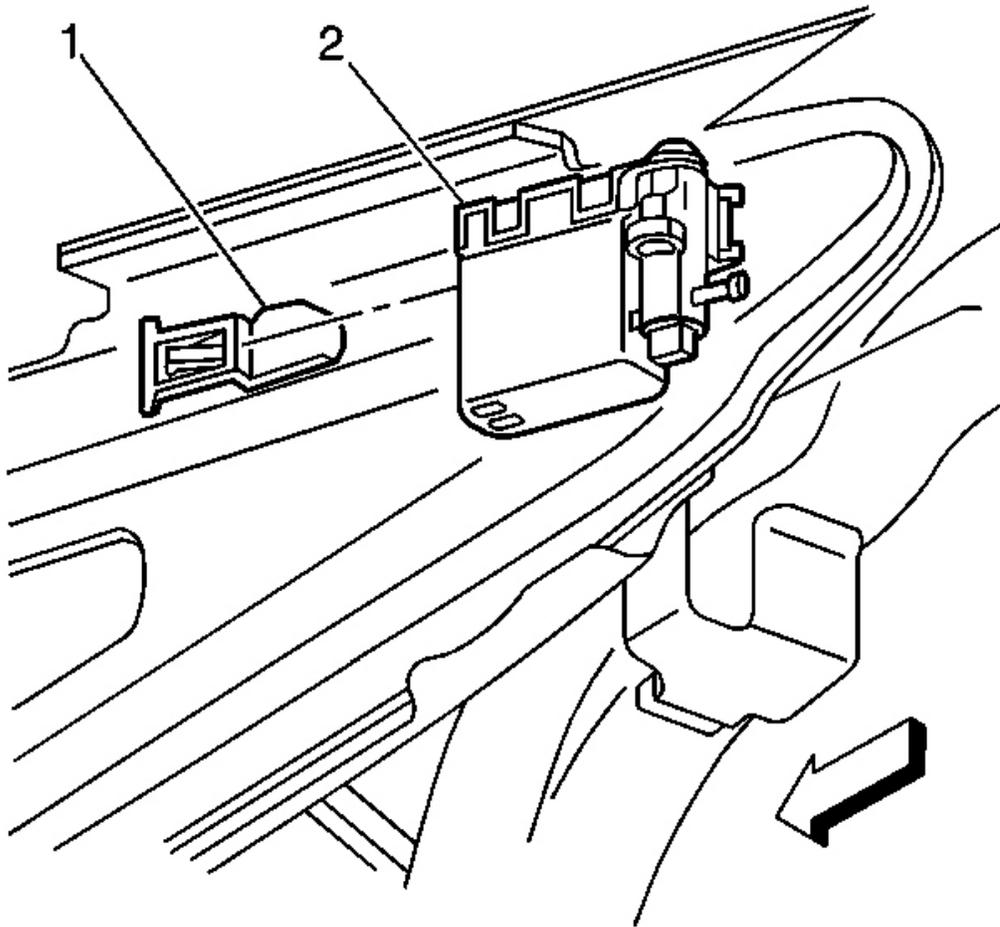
Chassis Purge Pipe & Engine Purge Pipe
